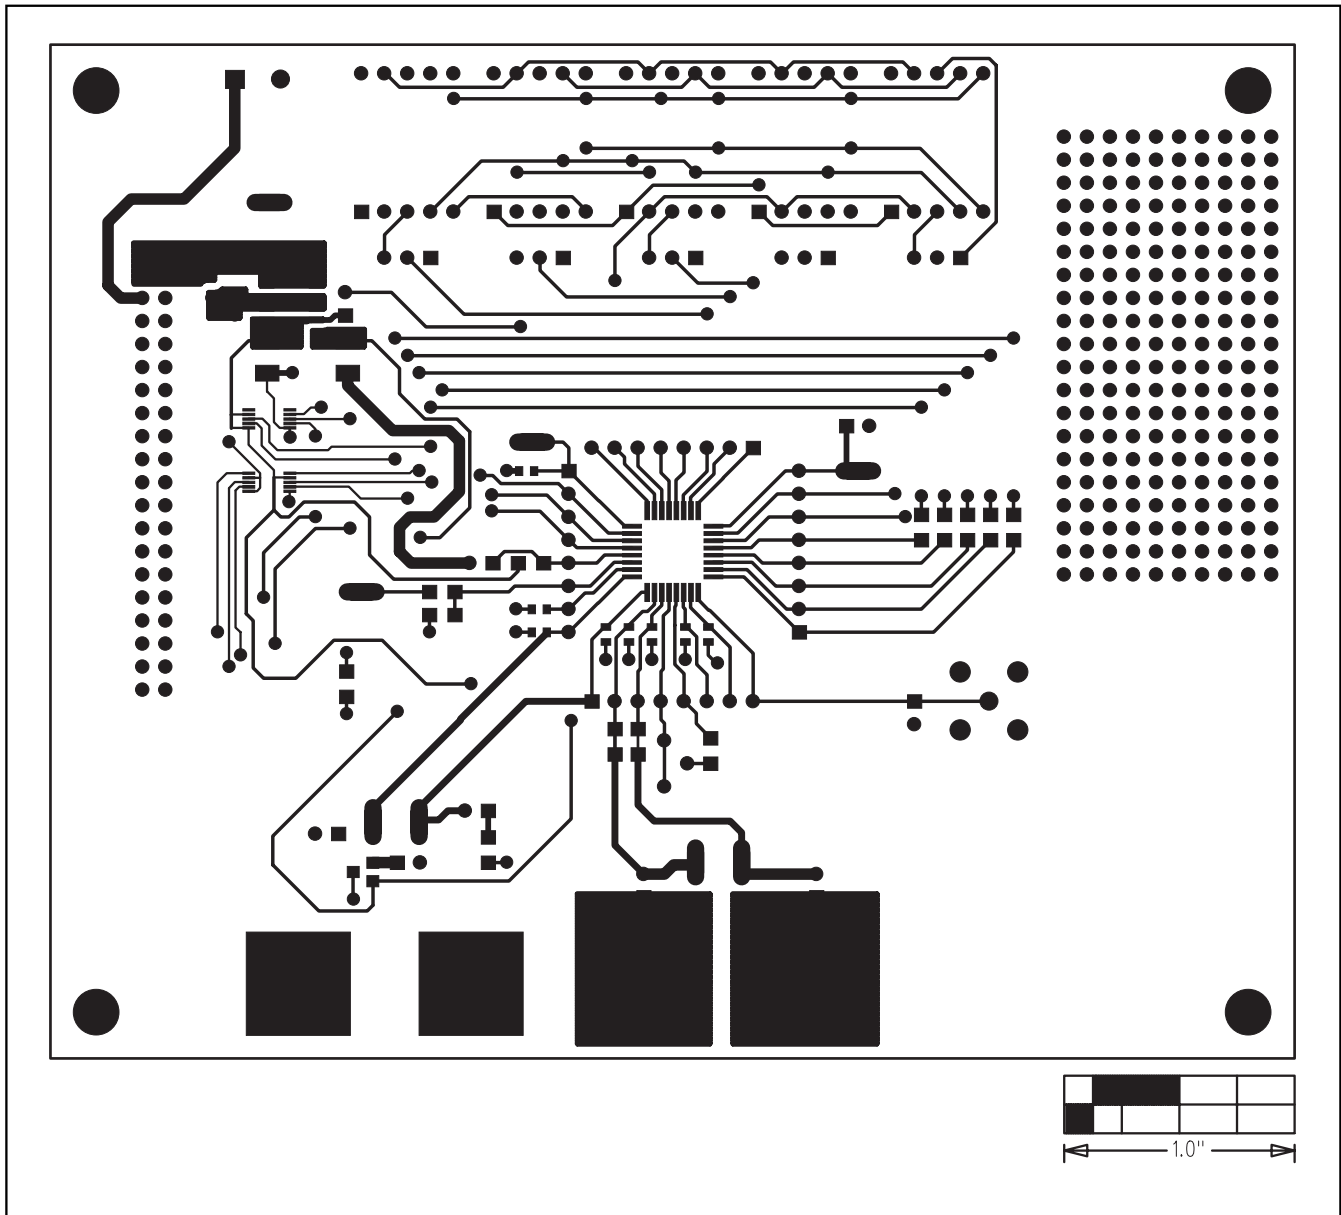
MAX1499 EV Kit PC Board Layout—Component Side
